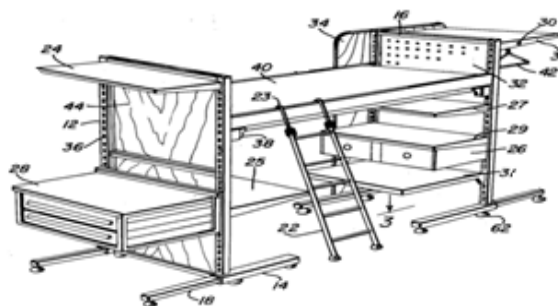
Exploded view of the modular furniture by inventor Chacon [9].
